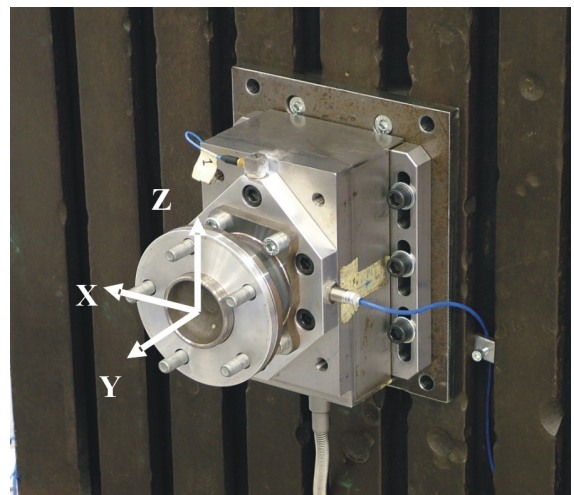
Multi-axial wheel hub dynamometer with built-in encoder.
